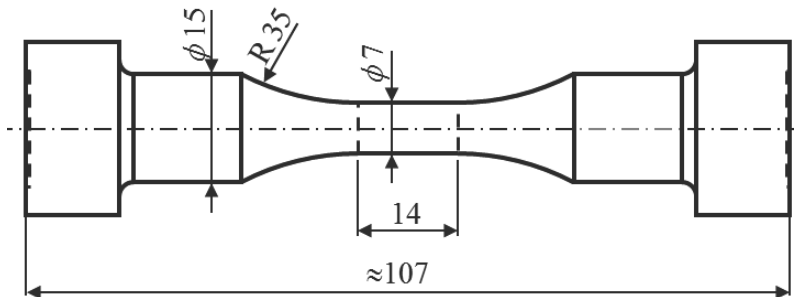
The dimensions of the axial fatigue test bar used for the bearing steel 100Cr6.
